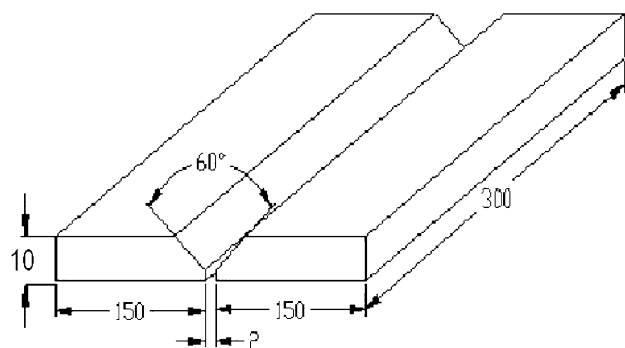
Dimensions of single V butt joint configuration (all the dimensions are in mm)
